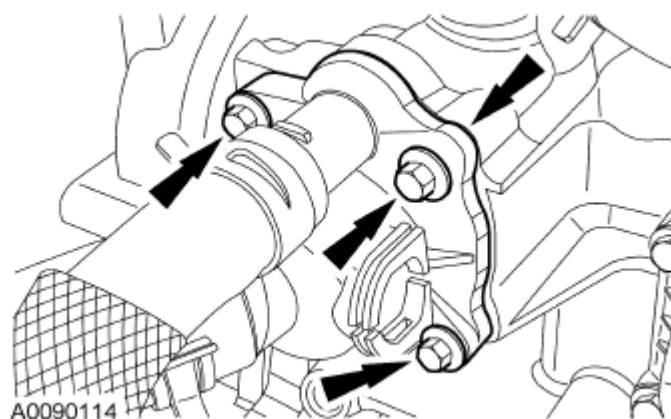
Locating Bolts And Thermostat Housing Assembly
